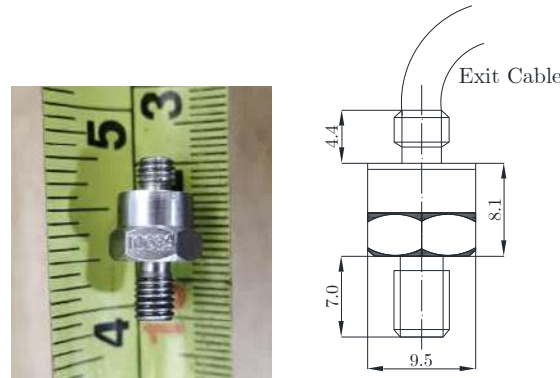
Birchall type A/23 piezo-electric accelerometer (dimensions in mm).
